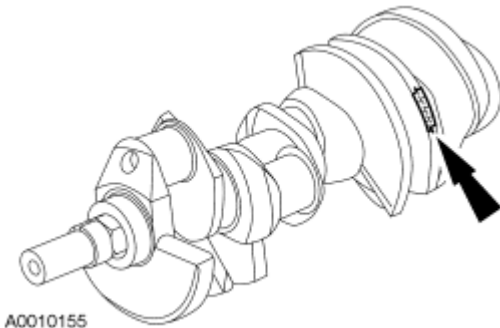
Identifying Main Bearing Code Found On Crankshaft Counterweight
